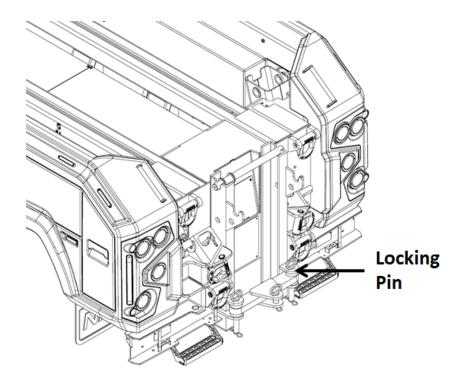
INSTALLING THE DRAWBAR ADAPTER
